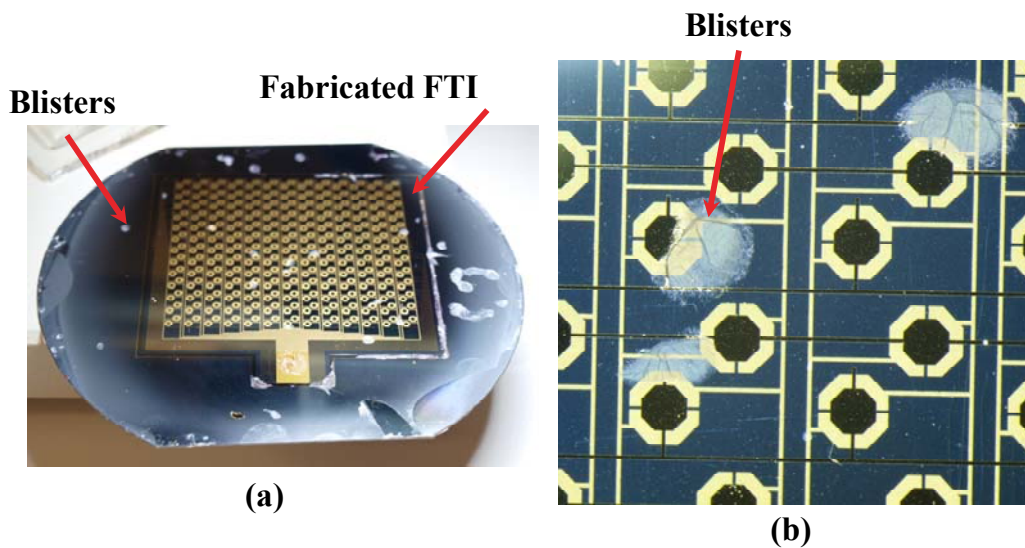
Blisters on the fabricated devices. (a) Entire fabricated FTI on the Si-wafer. (b) Image identifying blister formed in the parylene layer.
